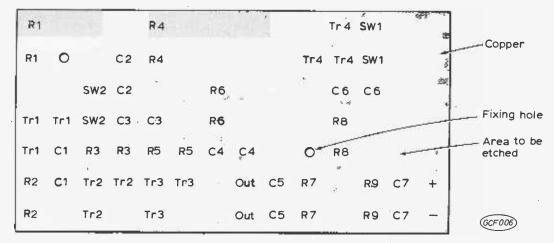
The dotted areas of Fig. 1 are transferred to the paper master as shown here, the final layout depending upon the sizes of the components to be used. The copper will be on the other side of the board, which is shown here twice final size.
